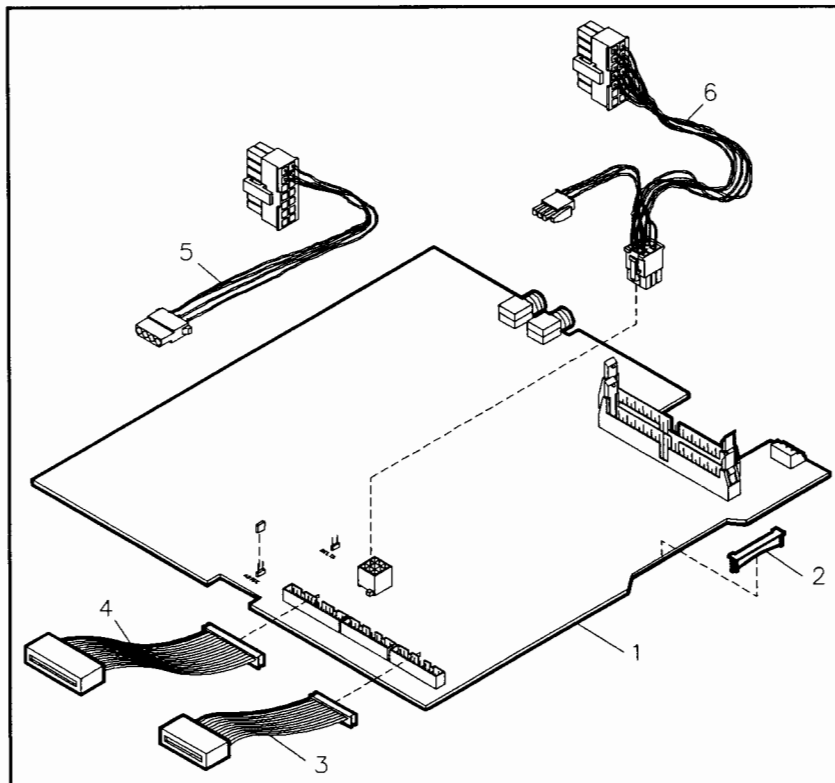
Model 670FL Controller PCA and Cabling, Exploded View
